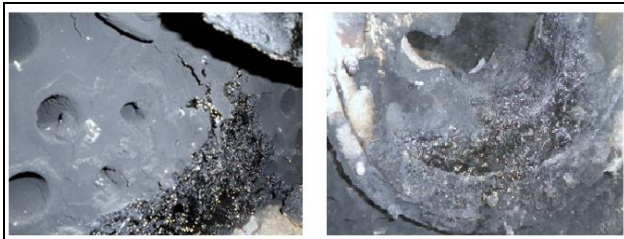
Hot corrosion aspect of a fire-tube boiler
